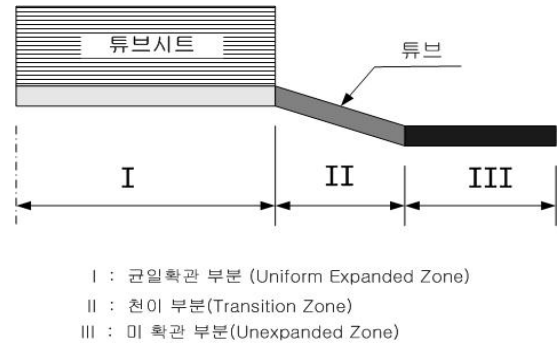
Schematic drawing of tube/tube-sheet expansion area.
